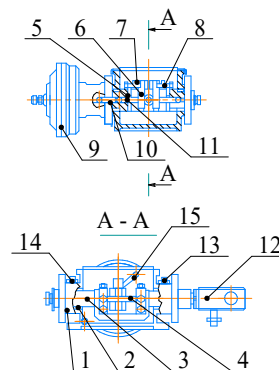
Schematic of a reciprocating test chamber for samples: 1 – collapsible housing; 2 – bearings; 3 – slider; 4 – sample rod; 5 – housing; 6 – sample finger; 7 – clamp; 8 – bolt; 9 – pneumatic chamber; 10 – rod; 11 – rod; 12 – fork; 13 – fitting; 14 – fitting; 15 – tube
